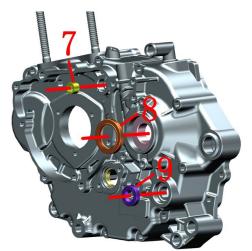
LEFT CRANKCASE		Left crankcase disassembly 1	CHK	40)
